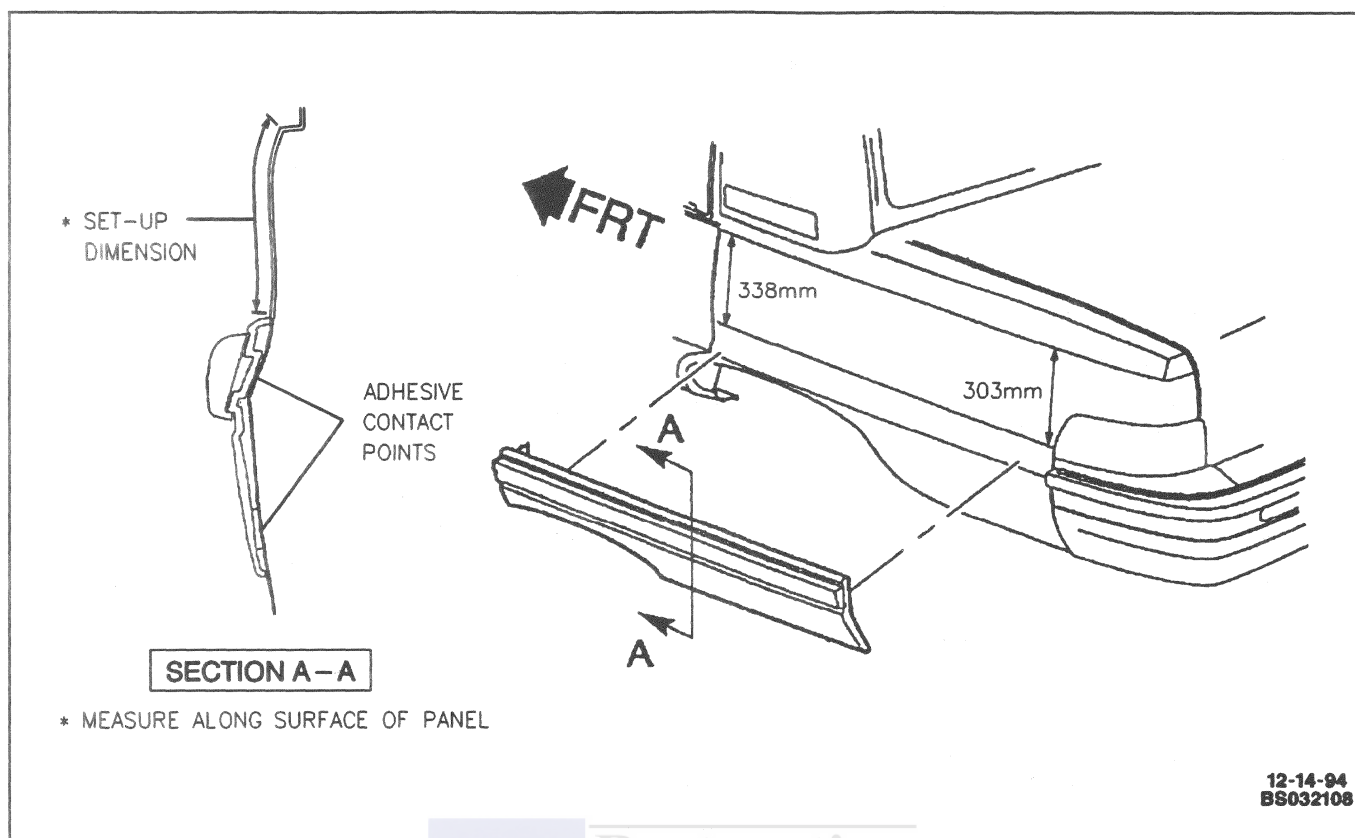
Rear Quarter Molding Adhesive - (Sedan)
